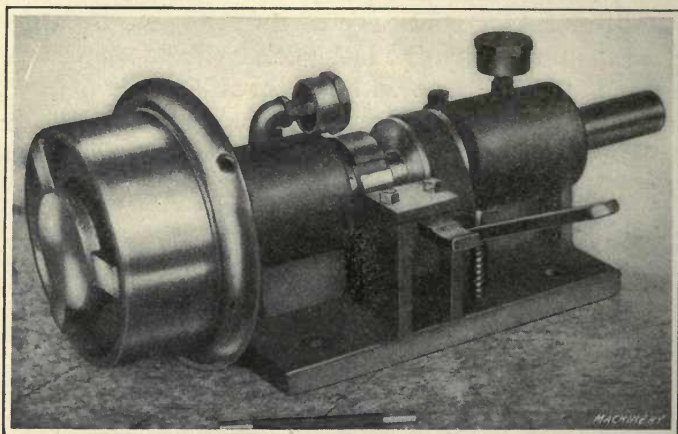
Special Rotary Chuck used on Besly Disk Grinder for surfacing Gas Plugs
